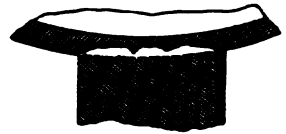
Explosion of a Cornish boiler from external corrosion.
